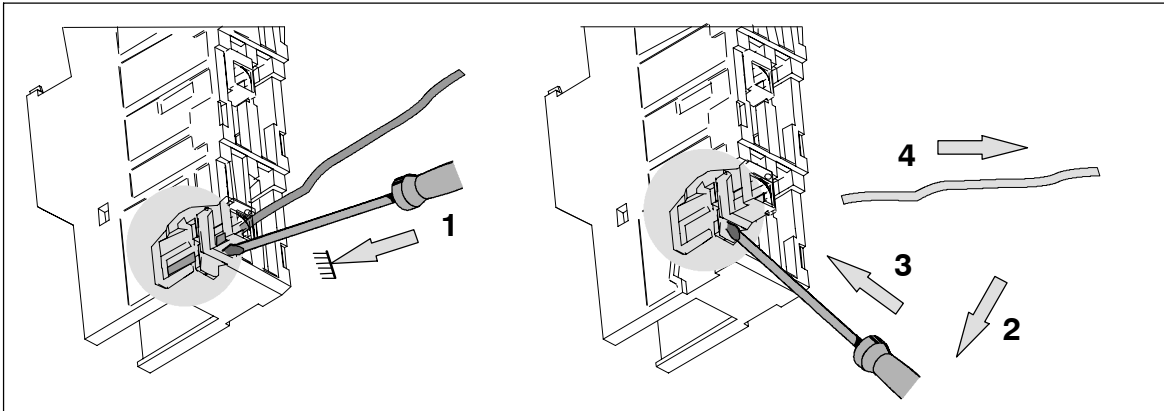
Releasing the Wiring of the Terminal Module with Fast Connect
